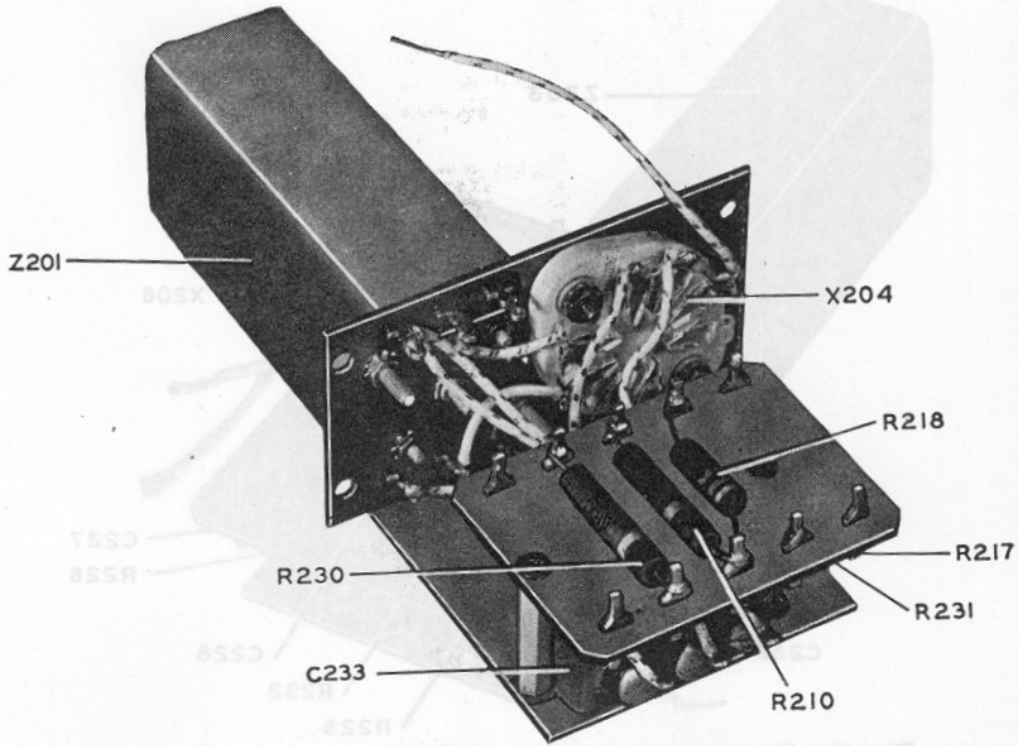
Receiver 1st I-F Amp. Assembly—Bottom View
